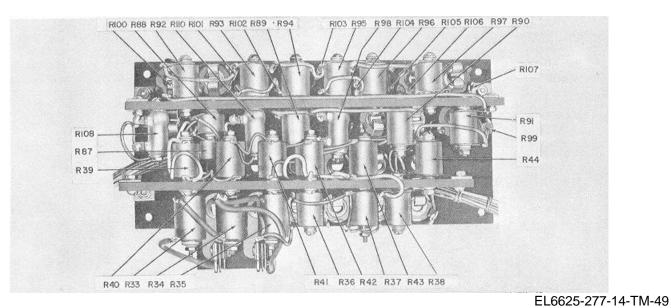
Meter Test Set TS-682/GSM-1, rear view of dc and voltage jack panel.
